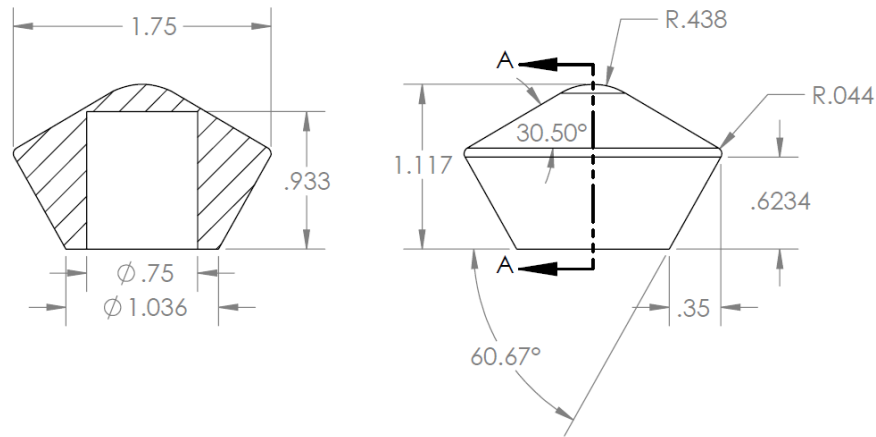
Drawing of 0° model for use with dummy sting. Dimensions in inches.
